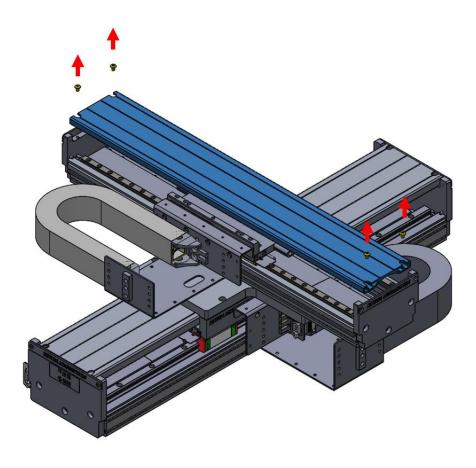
Exploded view of the cover – here for LMSSA2X
